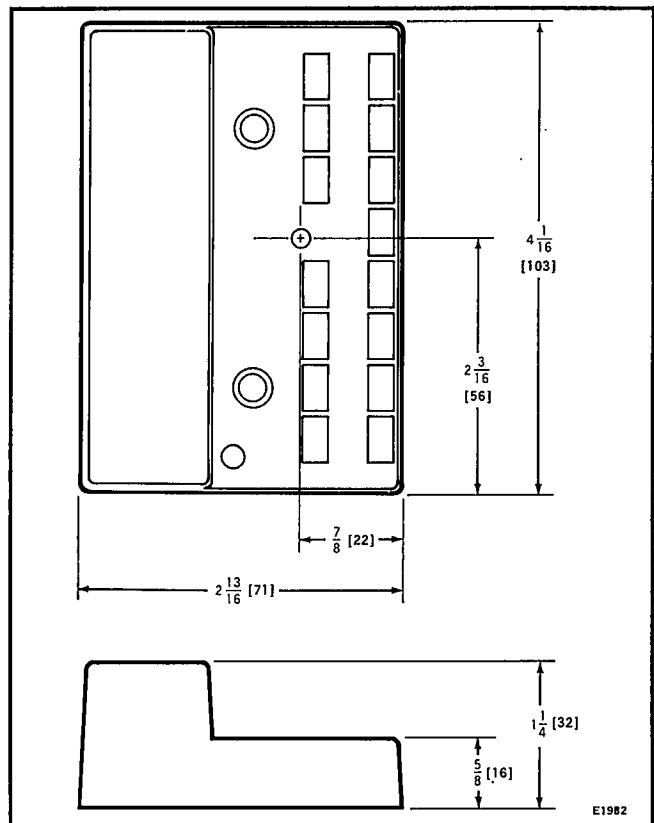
W7459 DIMENSIONS IN in. [mm IN BRACKETS].
